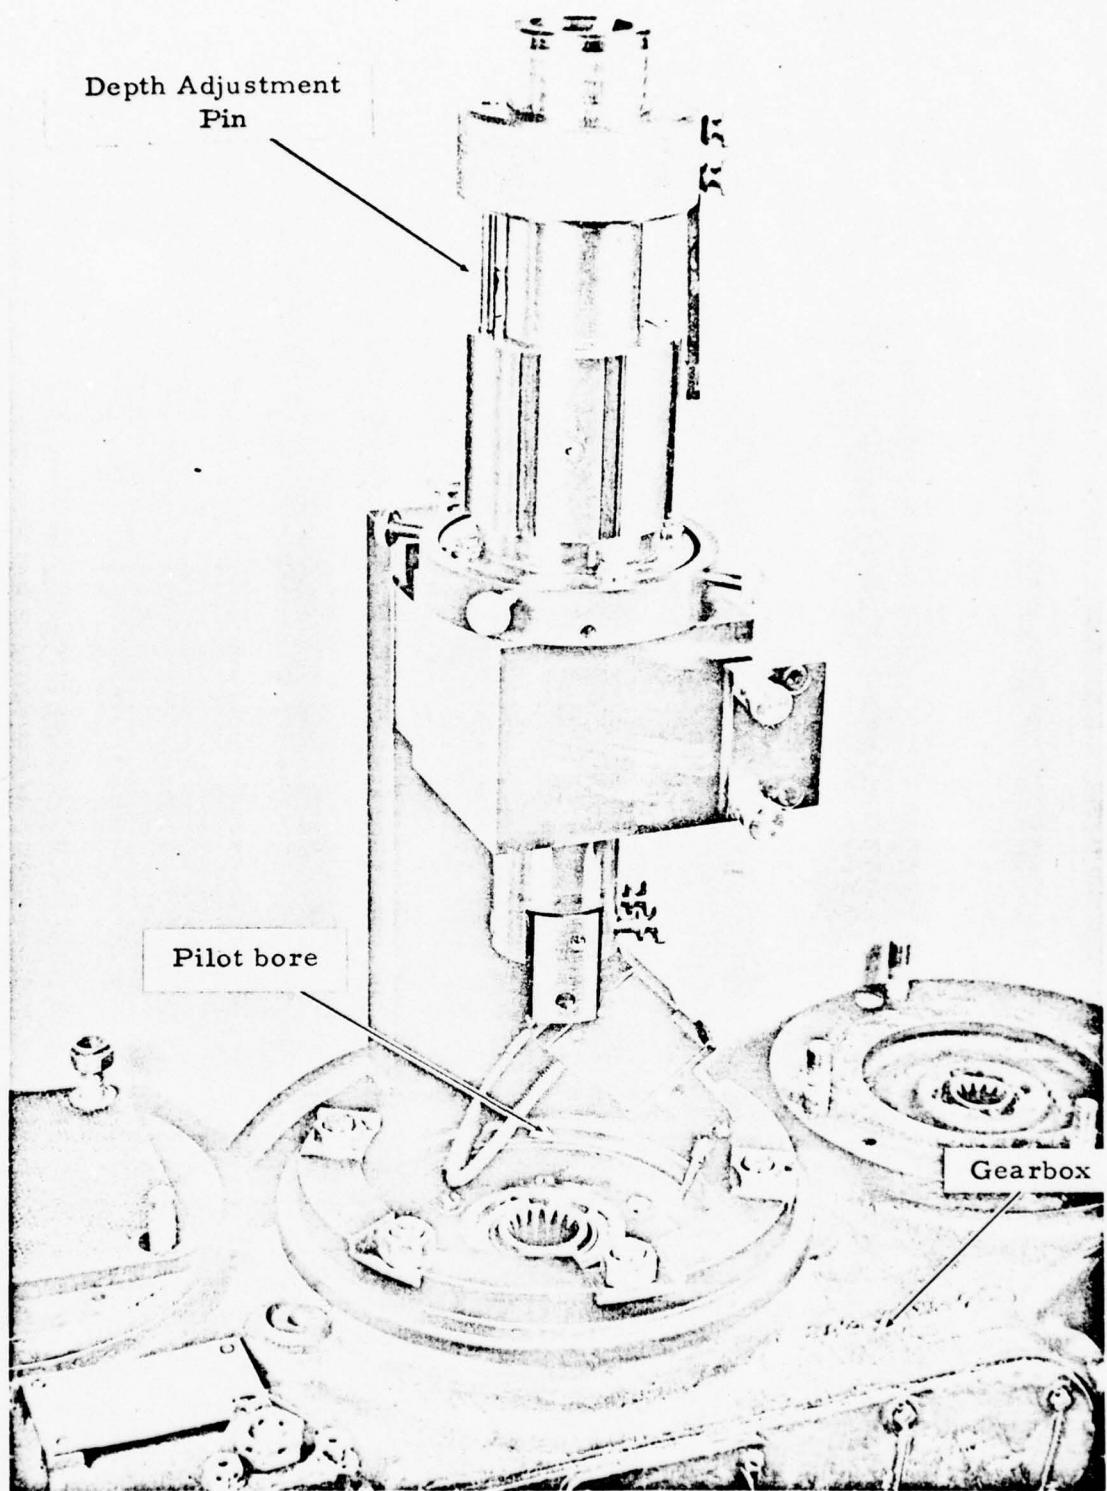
CENTER GAGE ON GEARBOX PILOT BORE
